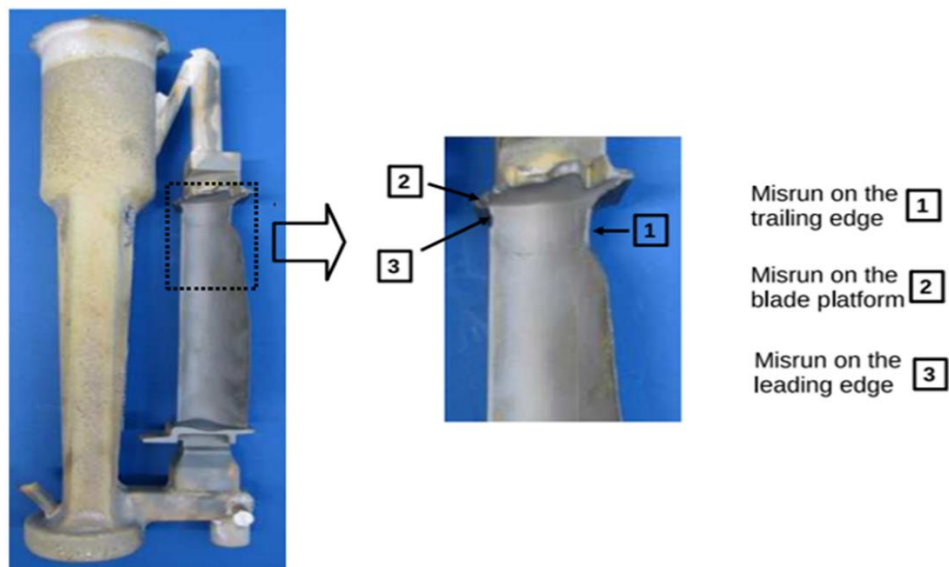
Misruns/casting defects during the casting of gamma -TiAl alloys [24]
